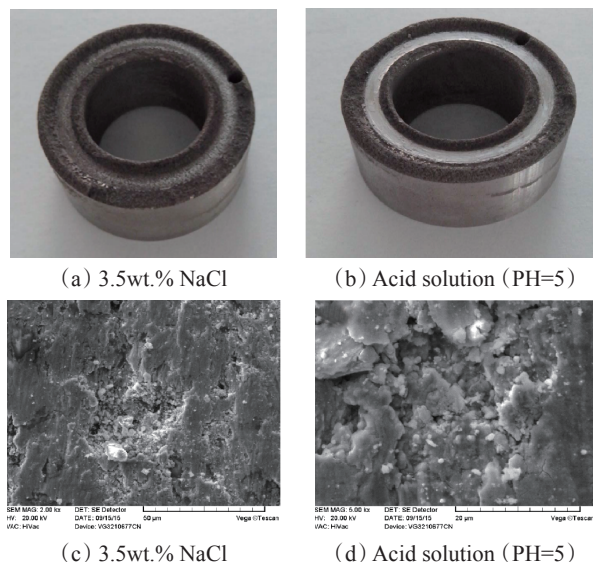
Worn surface analyses of micro-plasma welding deposited Ni/Diatomite coatings (tech2)
